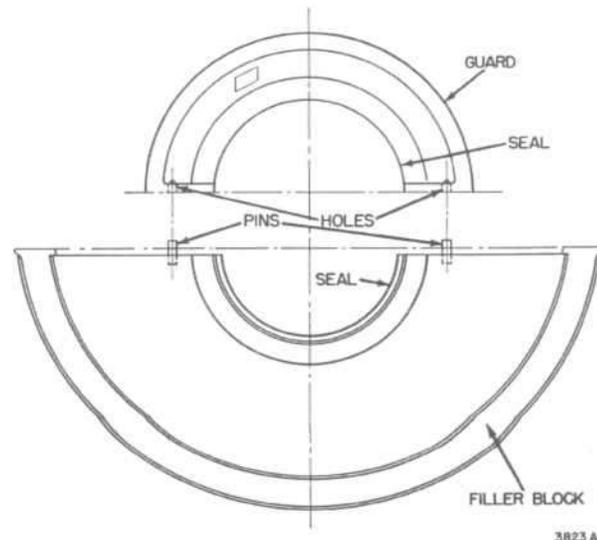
CRANKSHAFT REAR FILLER BLOCK DOWEL PINS
